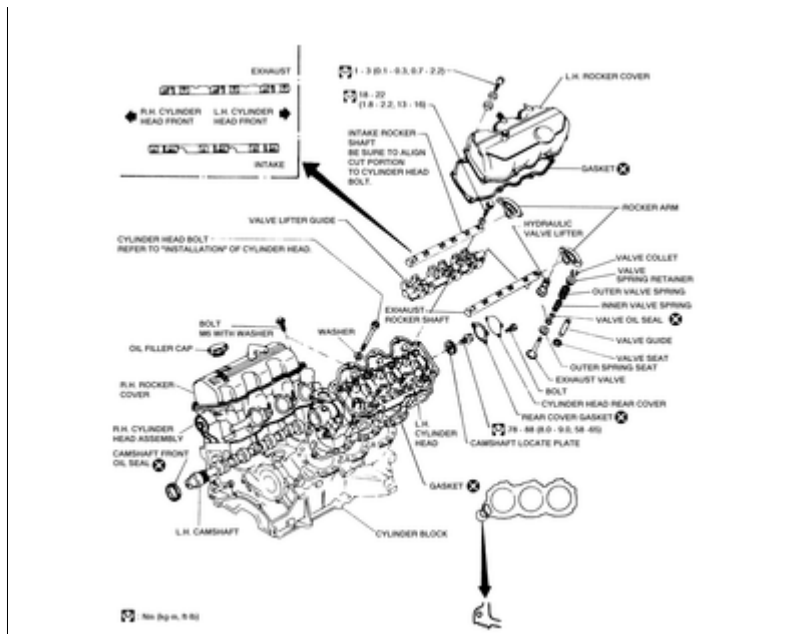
When removing the cylinder head bolts use a proper tool to loosen the bolts evenly — VG30E engine
